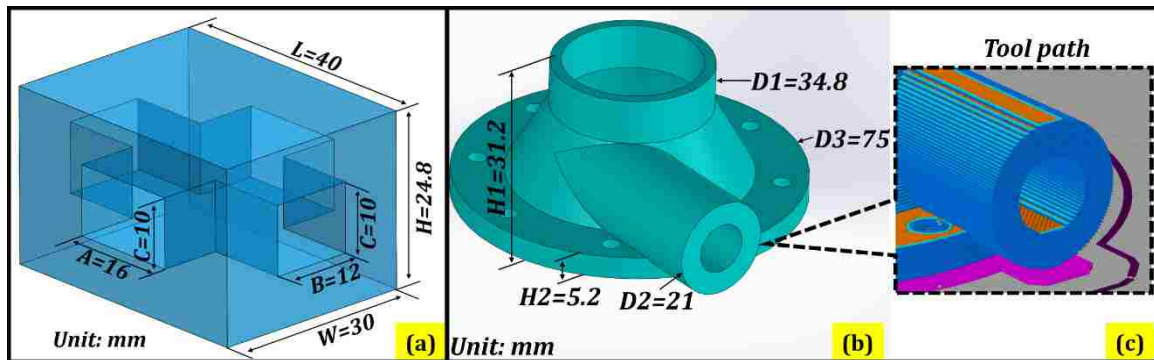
CAD models: (a) Cuboid part, (b) Turbine-blower housing part, (c) Partial view of tool path for the horizontal cylindrical feature in (b).
